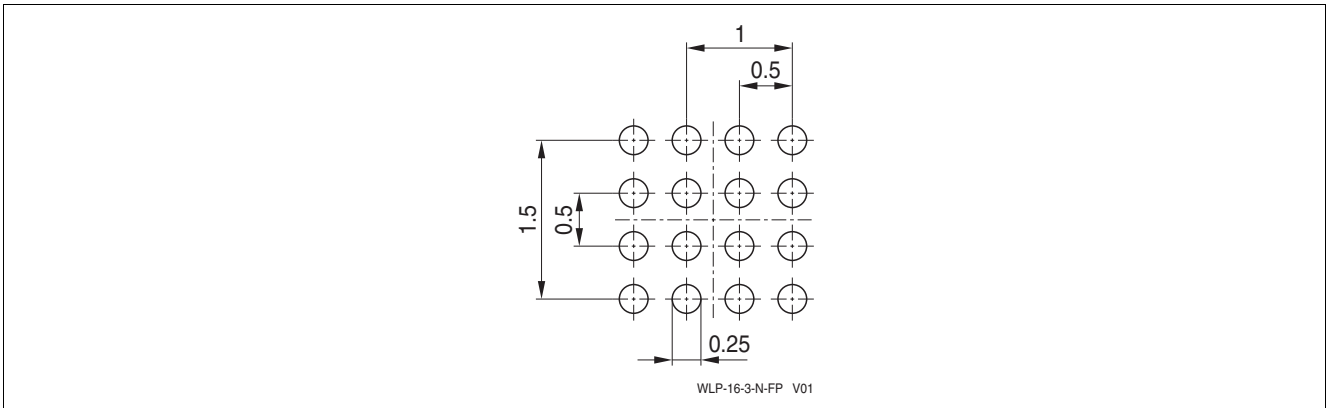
Footprint for WLP-16-3 (dimensions in mm)
